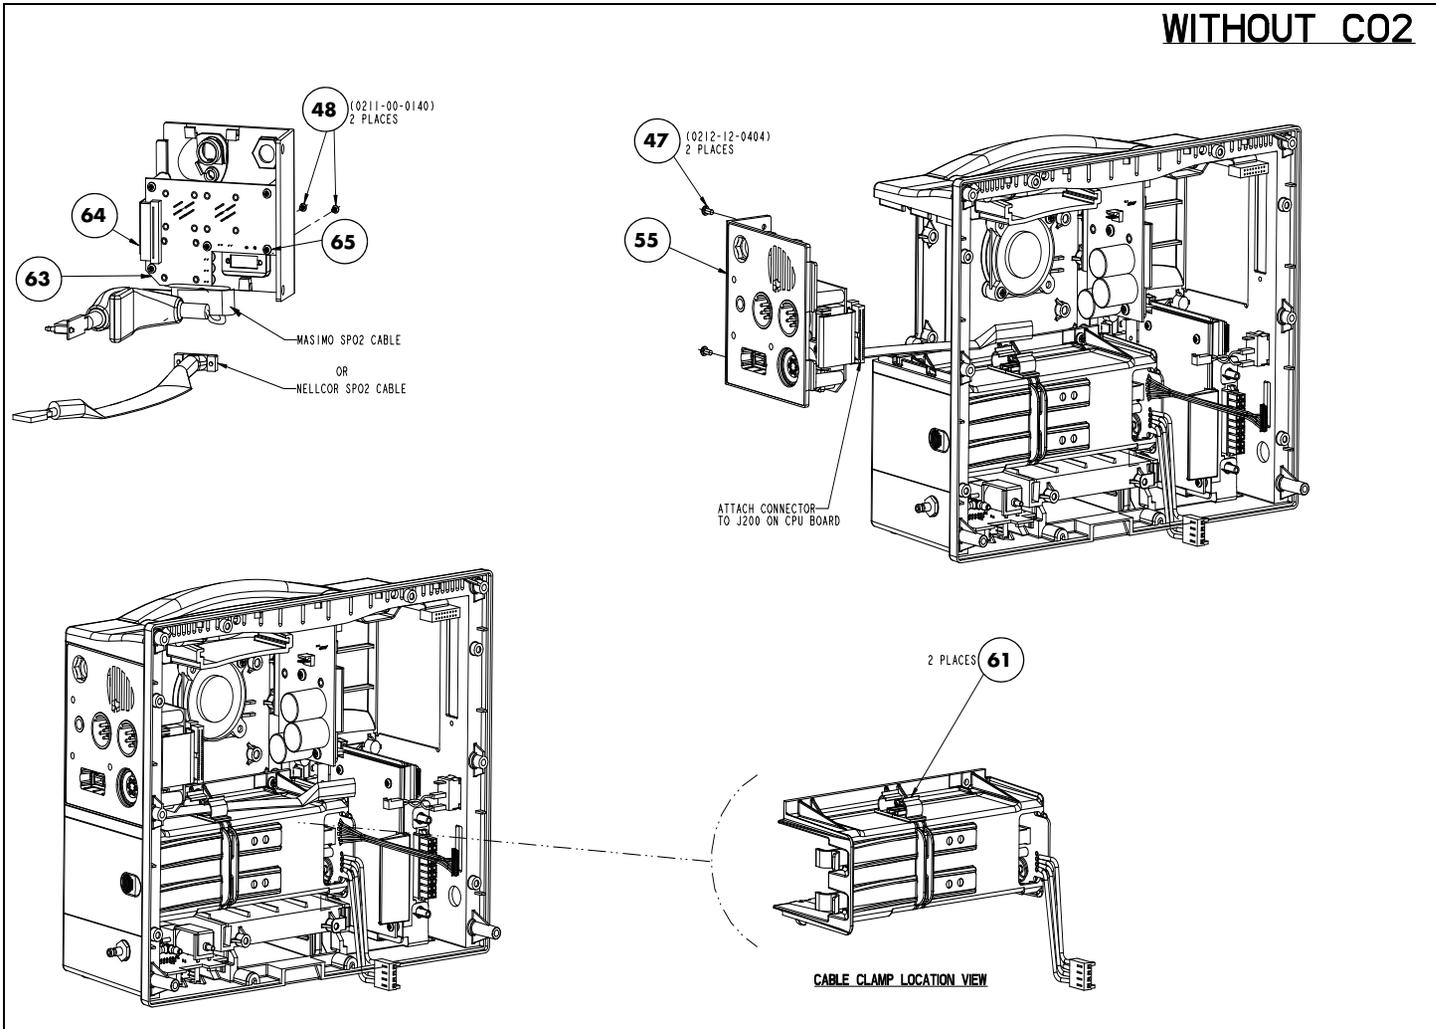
Rear Housing Assembly (Sealed Lead Acid battery configuration)
